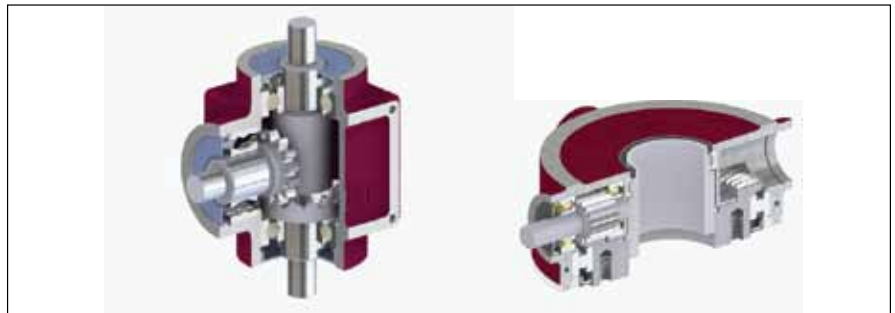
Block-shaped 1:1 and flat 1:5 versions of the Evolvere angular gearbox family.
